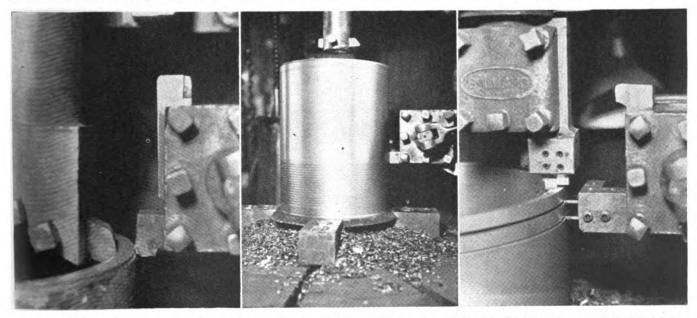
Left: First operation, rough boring and turning the pot—Center: Second operation, finishing the outside of the pot—Right: Third operation; facing, recessing and parting the valve rings
